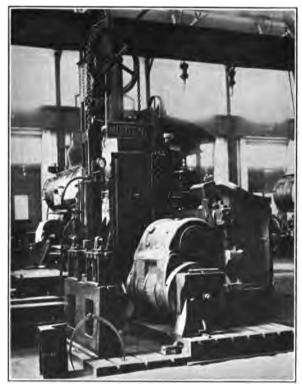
Planing a deep seat on the cylinder casting using draw-cut machine.
